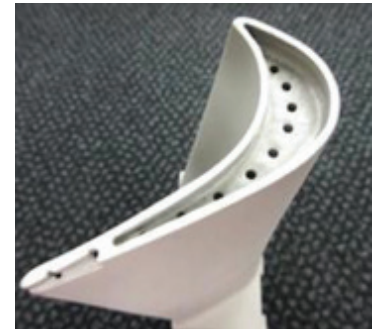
Top view of Fr7E, 1st Stage bucket
